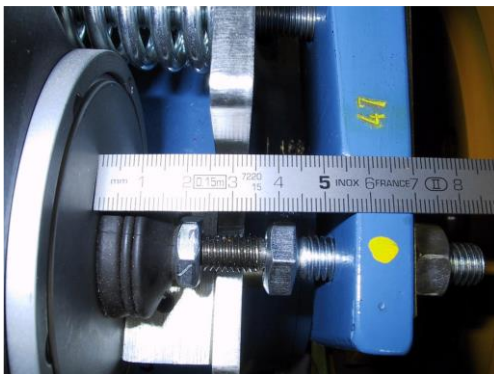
Measuring the clearance between Brake Lever and Solenoid
